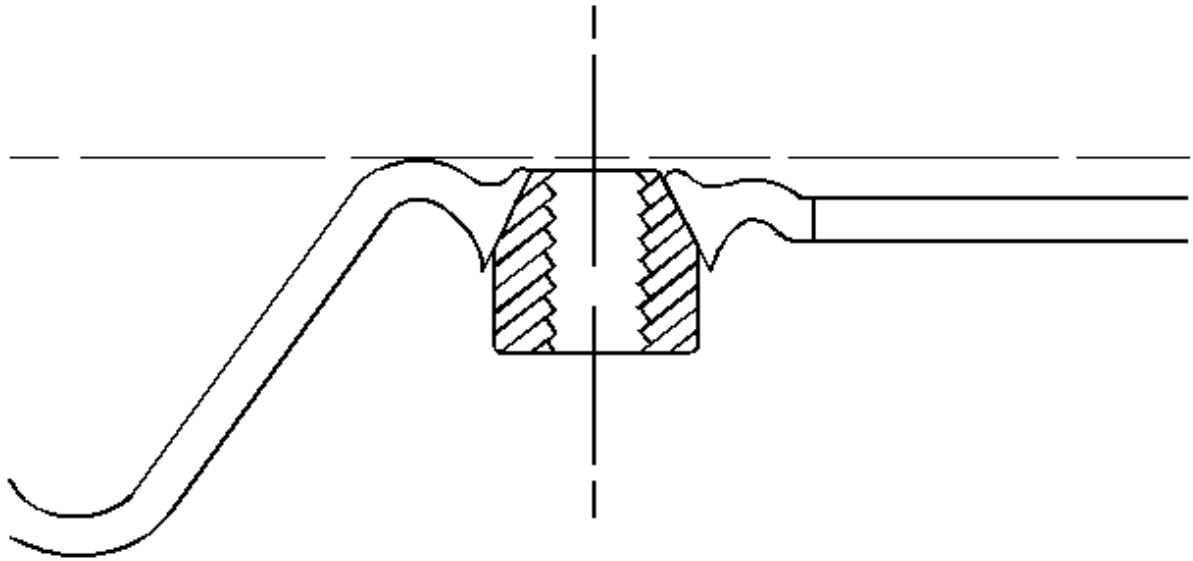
Identifying Mounting Wheel/Nut Holes Damage
